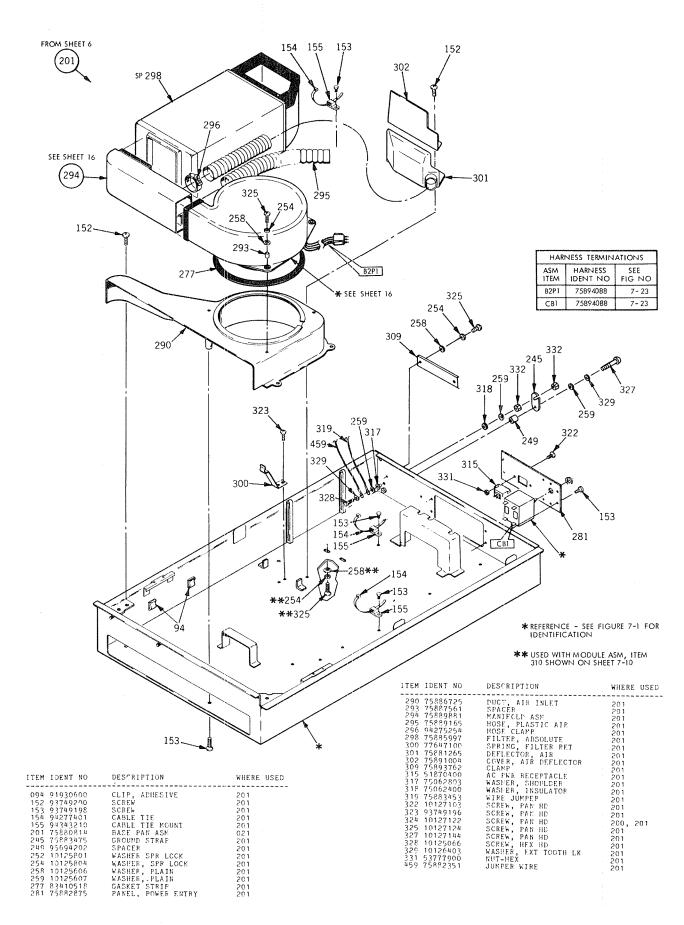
BASE PAN ASSEMBLY (SHEET 1 of 2)
